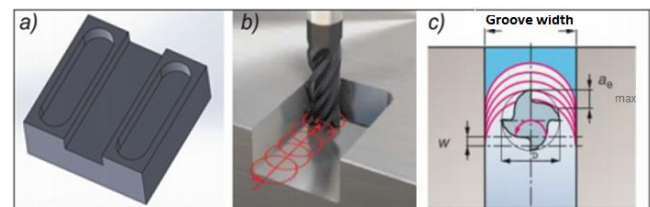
Workpiece: a) visible open pocket and two grooves, b) fragment of the tool trajectory, c) scheme of adjustable trochoidal milling parameters [7]
